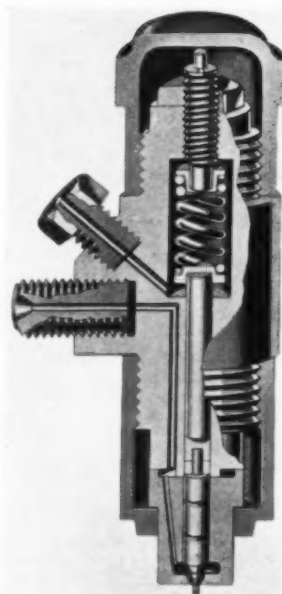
Cutaway section of the Bosch closed-type, single-orifice injection nozzle.
